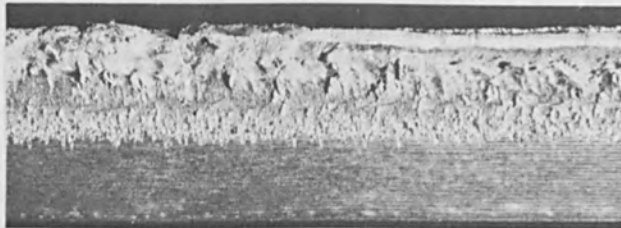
Fracture Appearance Showing Penetration in Aluminum Alloy Type 6061 Weldment Made Using Low Voltage Welder.
